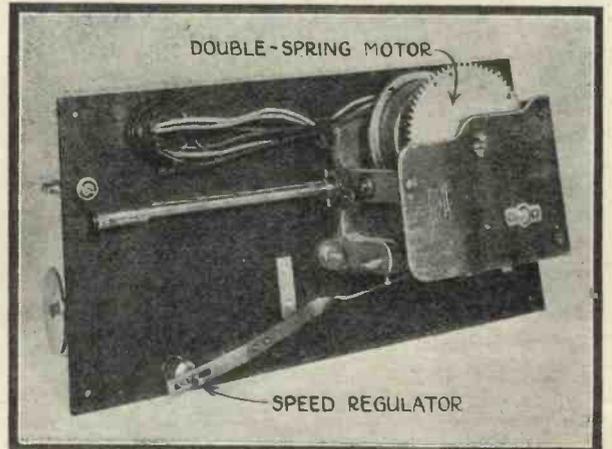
Here is another view of the double-spring motor, which is of the gramophone type. It is necessary to adjust the speed regulator so that the cylinder synchronises properly at each revolution
